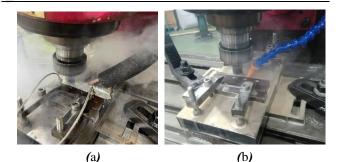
Experimental set-up and cooling methods (a) cryogenic cooling. (b) cutting fluid cooling.
